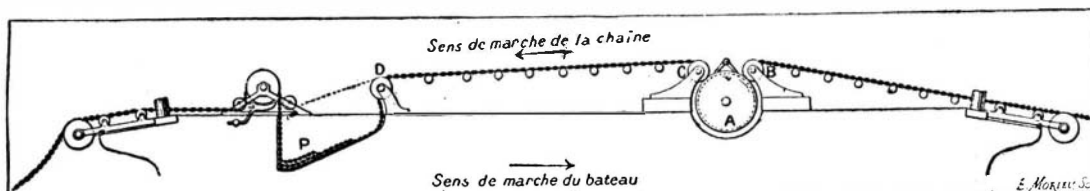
DETAILS OF THE ARRANGEMENT OF THE CHAIN.
